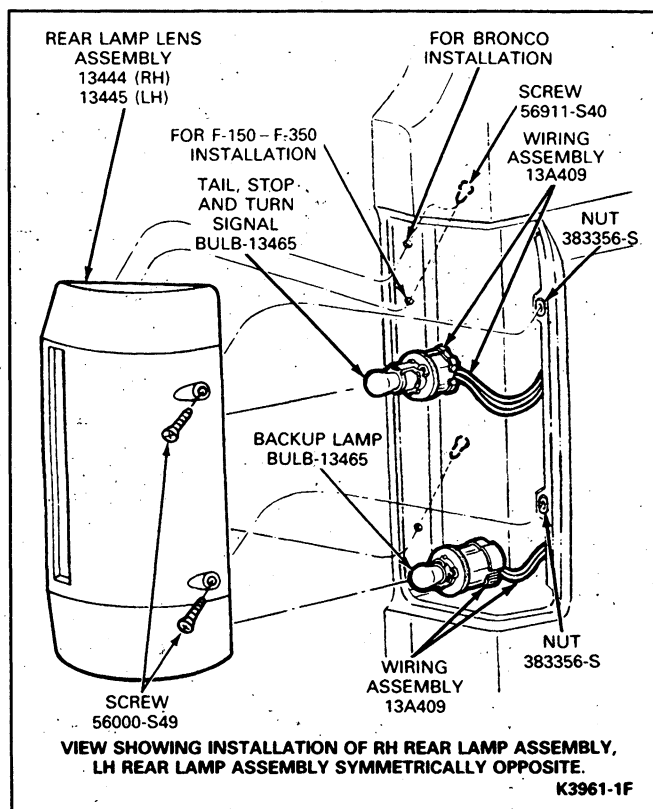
Rear Lamps—Bronco and F-150—F-350 Styleside and F-Super Duty
